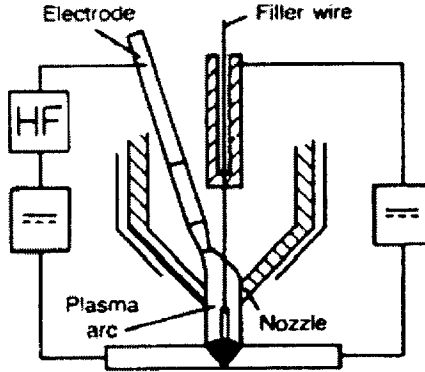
Schematic drawing of a plasma-MIG welding
